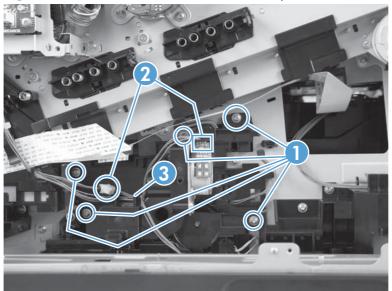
Remove the lifter drive assembly (2 of 2)
